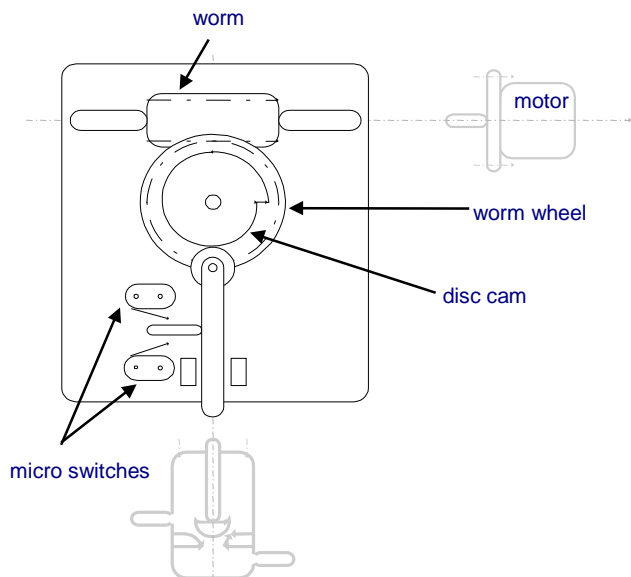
Motion transformer: gear assembly for transforming the motor torque
